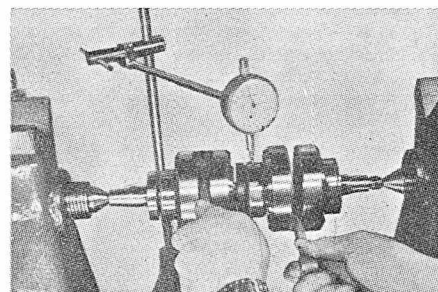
Method of measuring crankshaft run-out (eccentricity) using "V" blocks and dial indicators is shown above.
